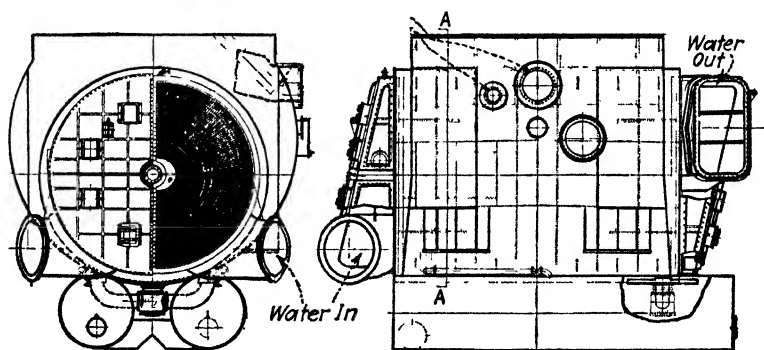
Westinghouse 113,000-sq ft single-pass condenser.
